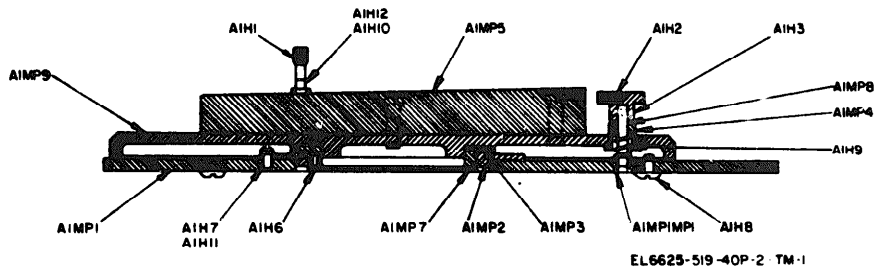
Fixture, test, gyroscope, sectional side view.
